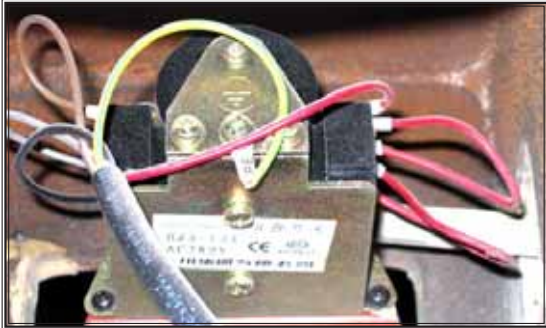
Spindle motor direction switch (SA3) (hidden above pump and tank assembly in lathe stand casting).
